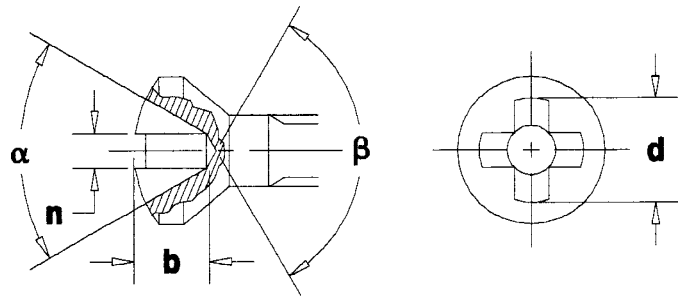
Schematic of Screw with Cross-Recessed Drive Connection (Table A6.2)
